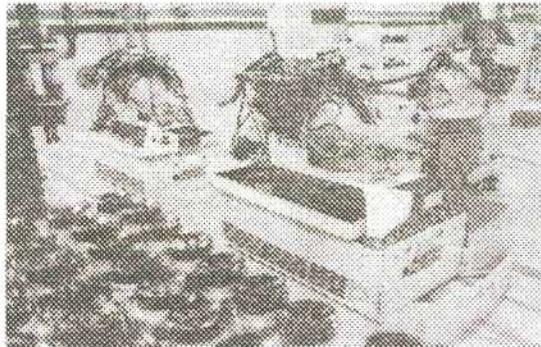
Unit load AGV used in the construction of a automobile engine. [Groover]
